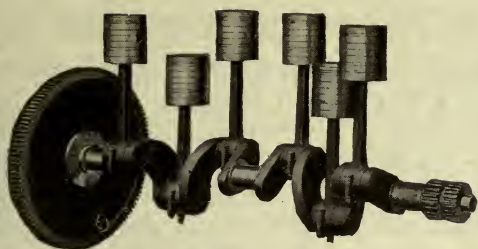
Chandler Crank Shaft Assembly. Right Hand. Firing Order 1-5-3-6-2-4.
